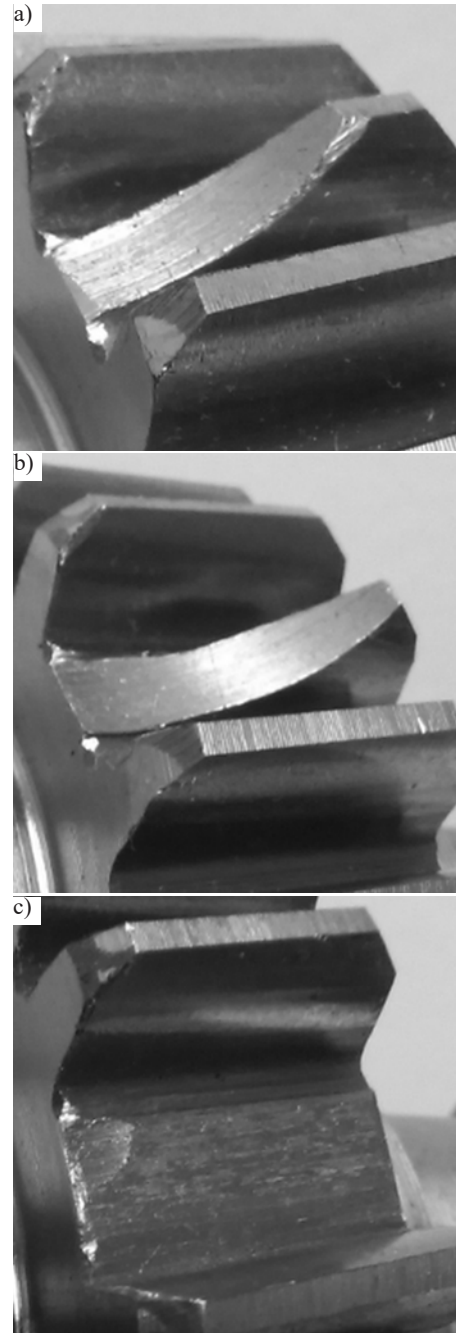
Different gear tooth chipped levels (a) – 0,25c; (b) – 0,50c; (c) c – 1c
